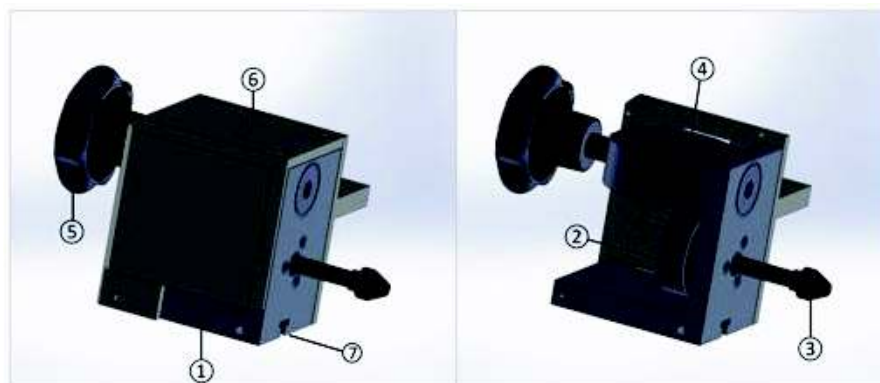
Rotative drill: 1) Base; 2) DC Brushless Motor; 3) Chunk; 4) Load Cell; 5) Knob; 6) 3D printed case; 7) T-shaped groove.
